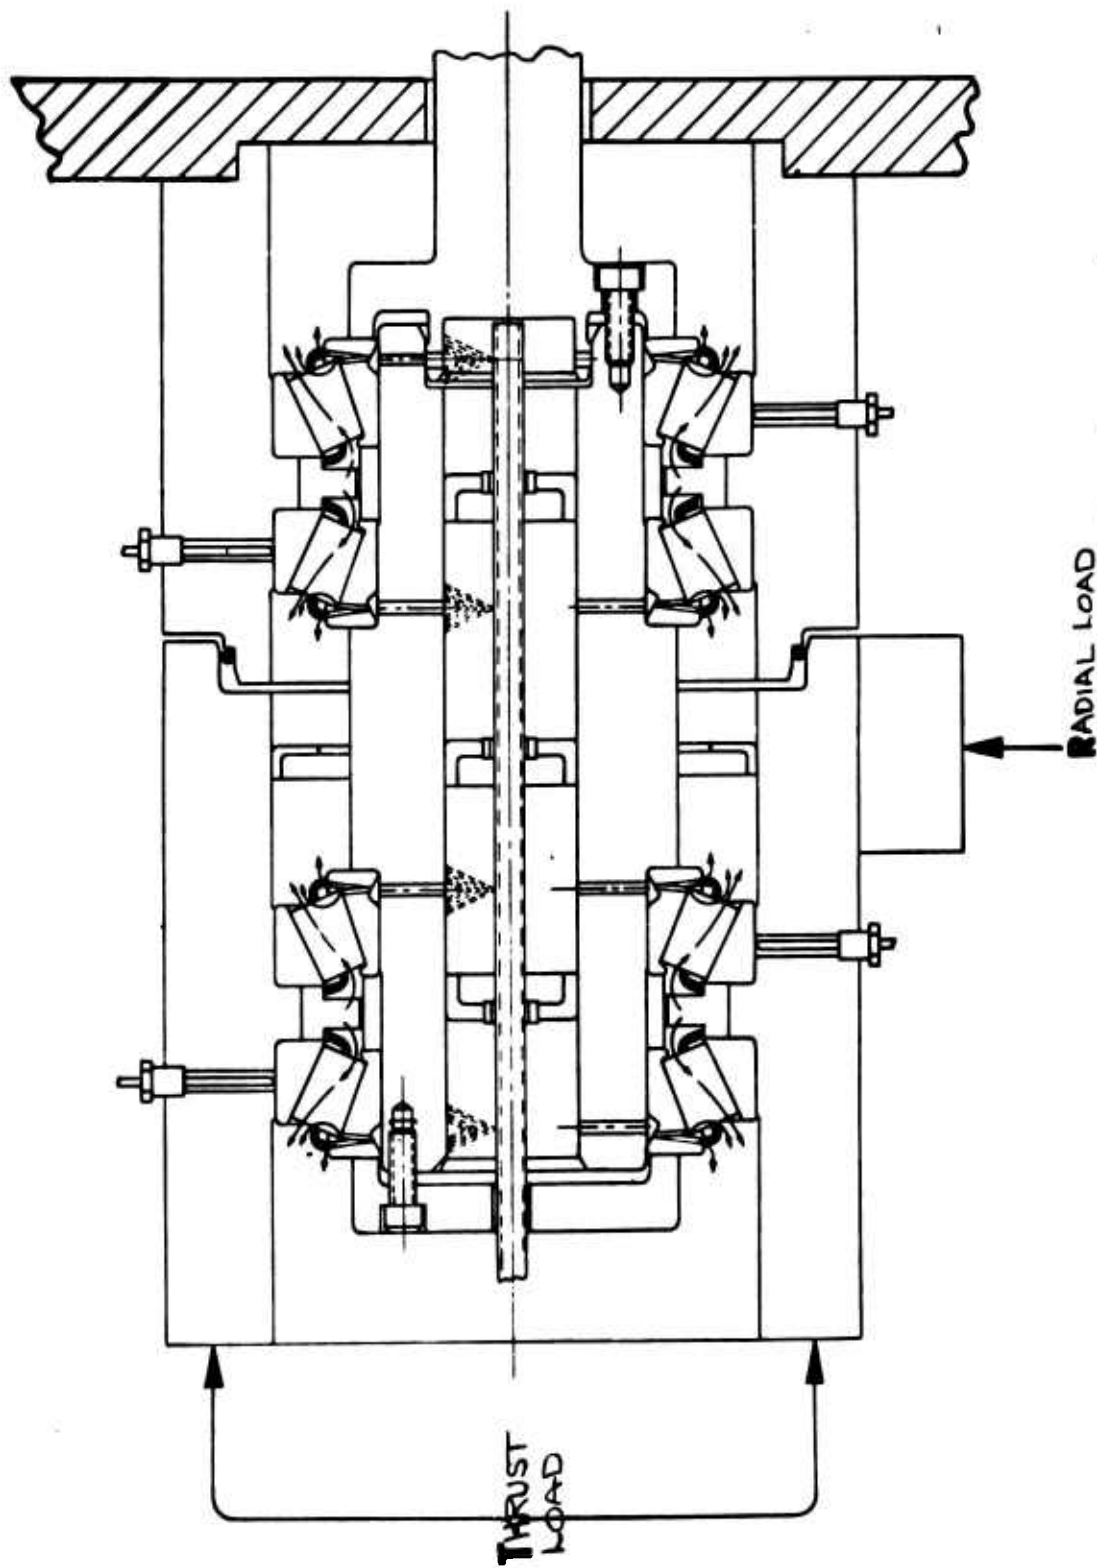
Schematic of HLH Test Machine Showing Bearing Mounting, Loading, and Lubrication System.
